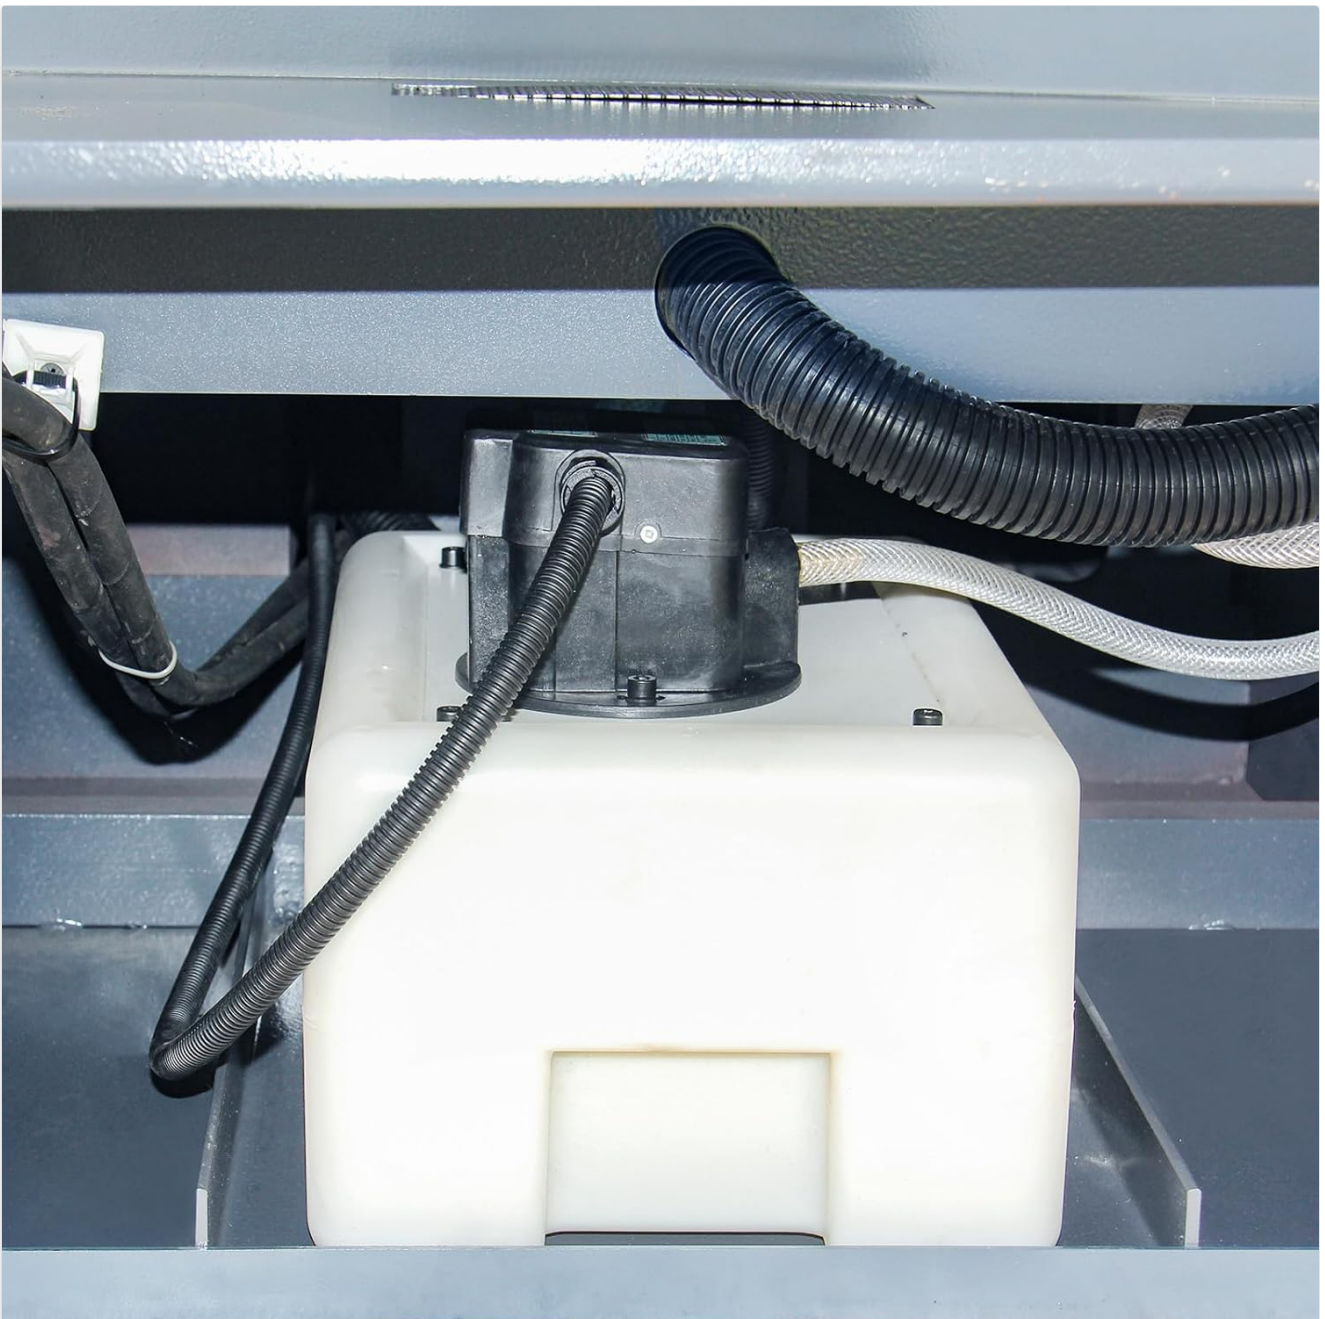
View of the coolant reservoir. This component stores the cutting fluid used to cool the blade and workpiece during operation, contributing to extended blade life.
